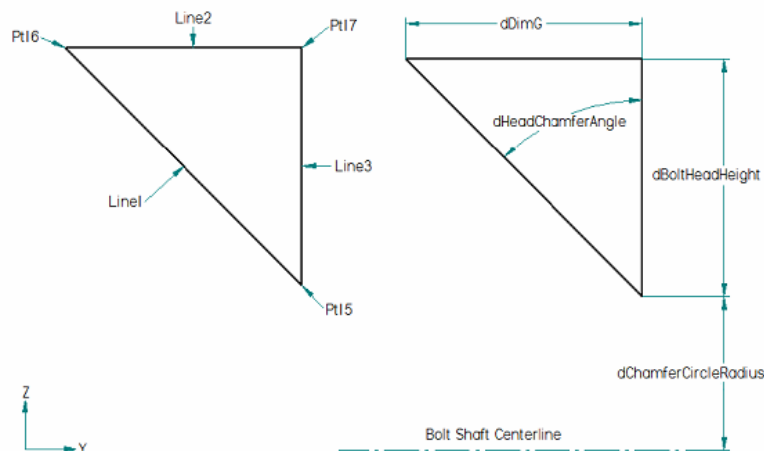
Labeled and dimensioned drawings of the bolt head chamfer profile
